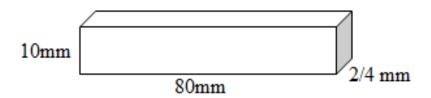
Printed test pieces for impact resistance tests without notch.
